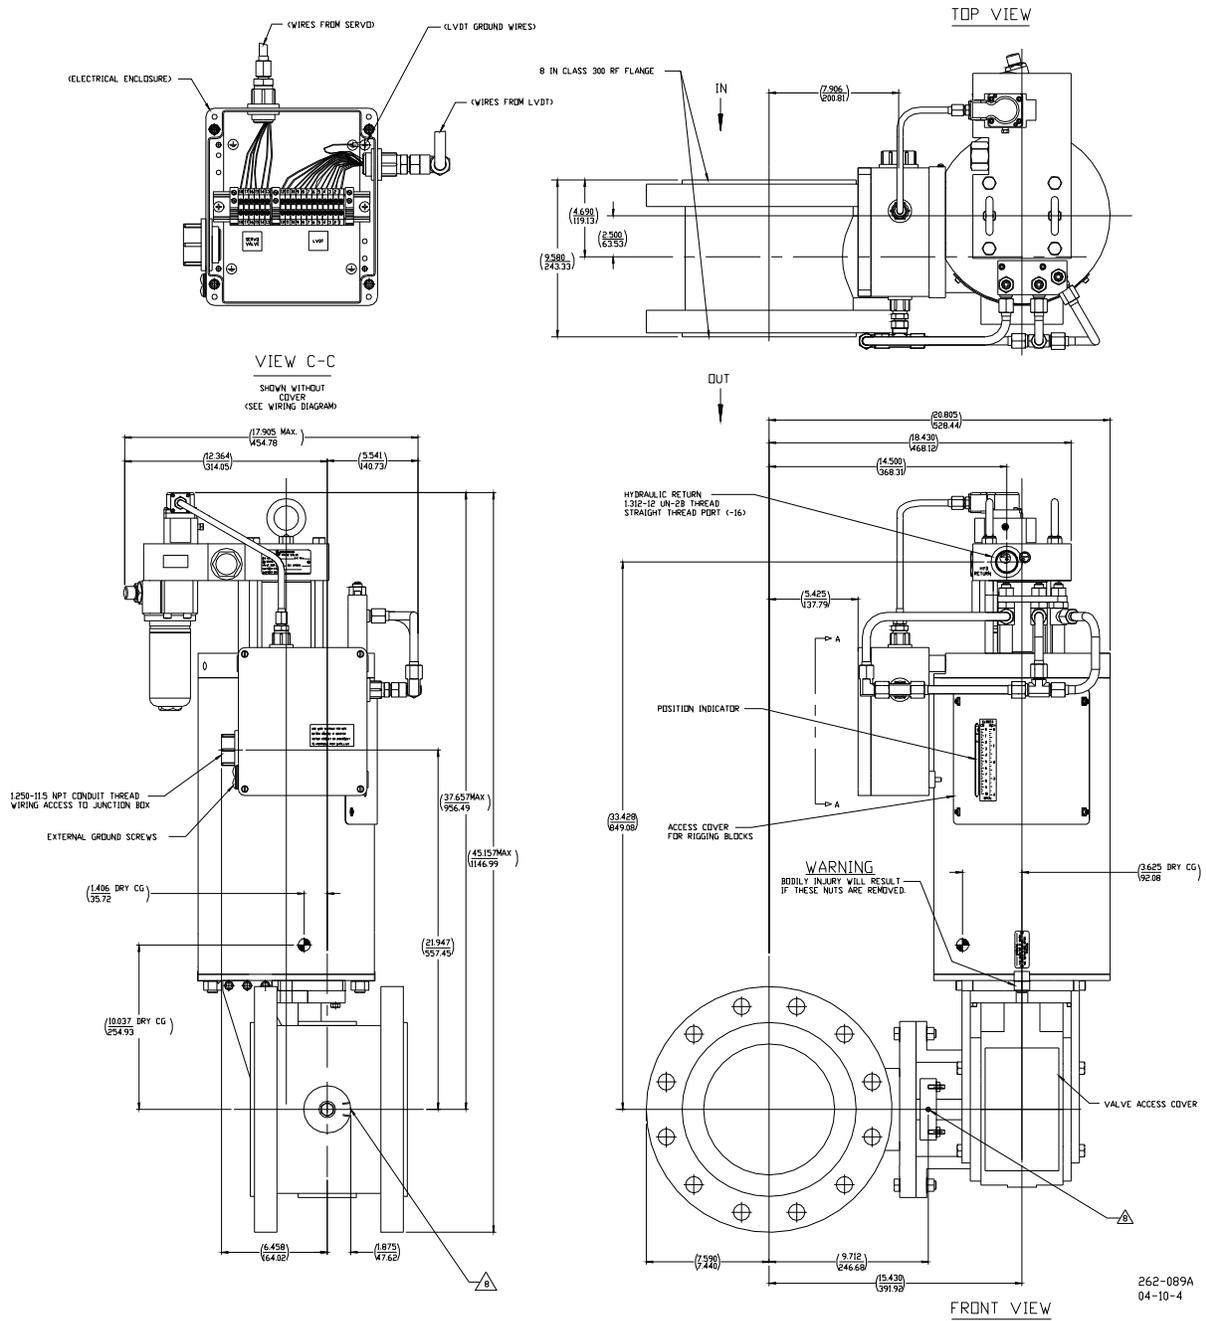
Gas Stop/Ratio Valve Outline Drawing (8-inch, with 3 LVDTs)
